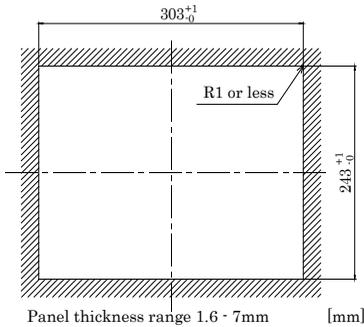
FPD-L71ST-DC1 [12.1 inches] Panel Cut Dimensions and hole position for stud
